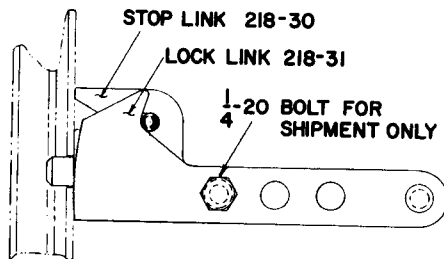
(0116B5046-0) Front View of Drawout Mechanism Padlock Device
